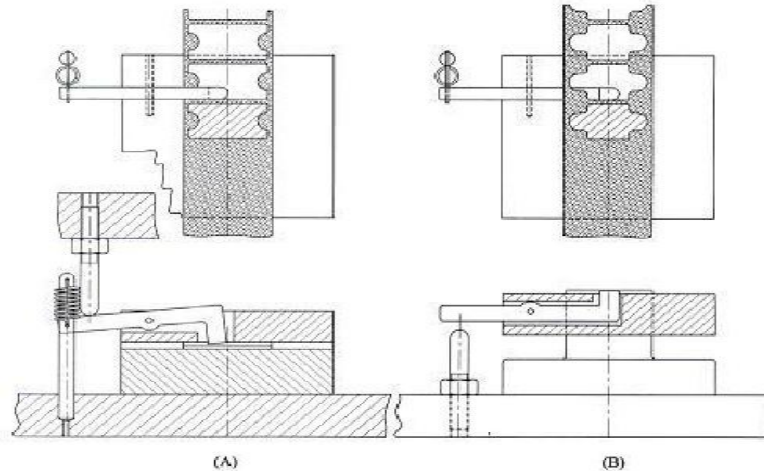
Trigger stops: (A) Top stock engagement; (B) Bottom stock engagement
